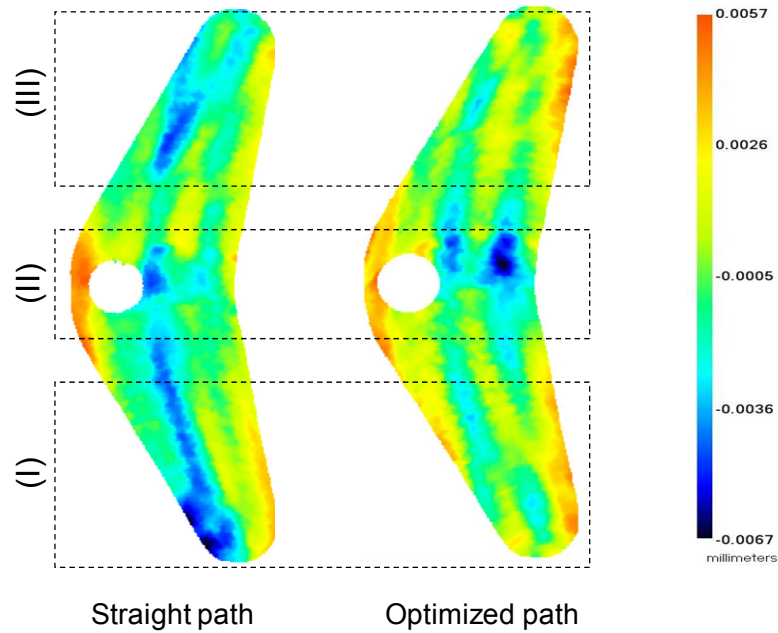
Machined surface produced by optimized cutter path with constant feed rate
